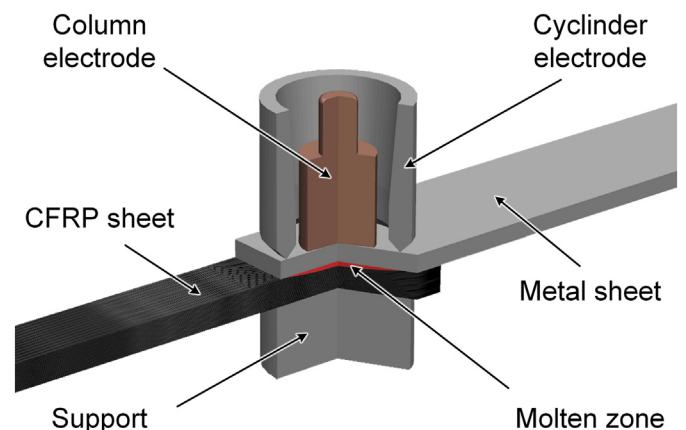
Schematic of the coaxial one-side resistance spot welding process.
